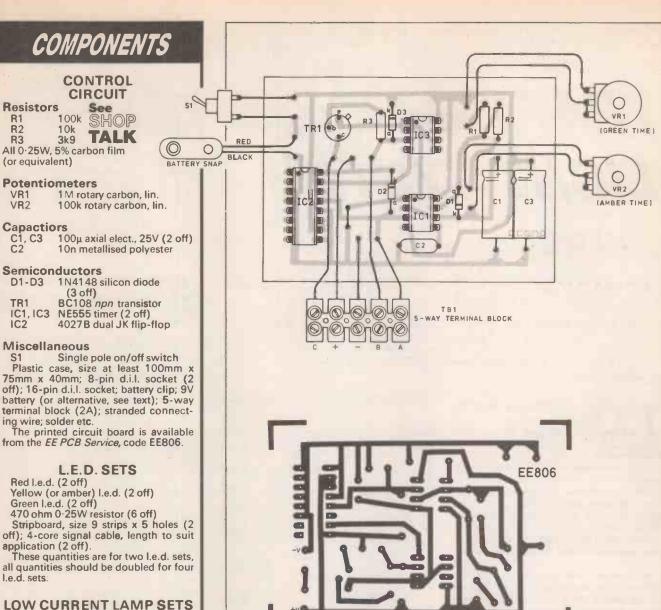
Printed circuit board component layout, interwiring to board and full size copper foil master pattern.
